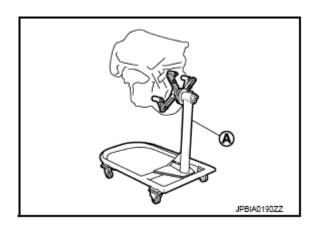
Mounting Engine On Engine Stand Courtesy of NISSAN NORTH AMERICA, INC.
